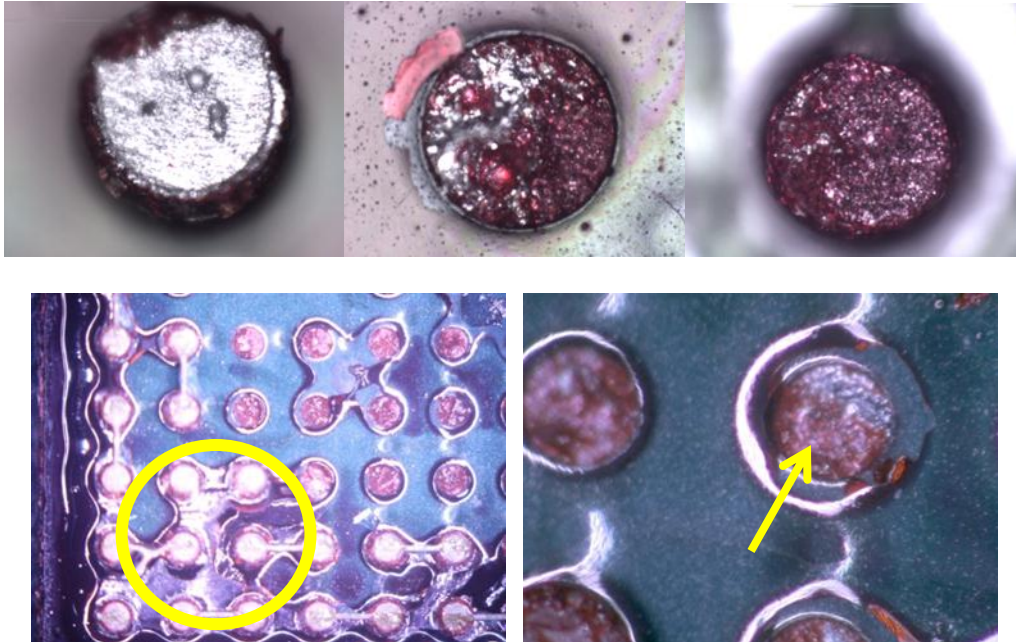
Dye and pry experiment to determine the extent of the crack in the solders. (Overloaded solder in pry (top-left), partial open solder (top-center), completely open solder evident by full dye coverage (top-right)) & Partial crack growth in the solder (bottom).
